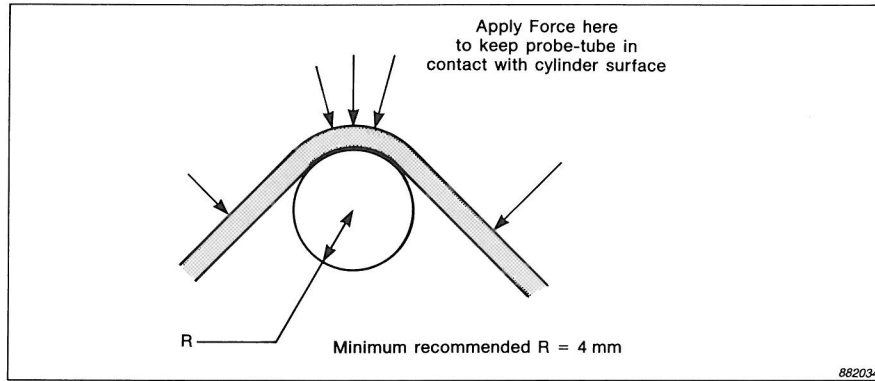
To prevent the inner cross-section of the probe tube from collapsing during bending, ensure that it maintains contact with the cylindrical surface by pressing as shown
